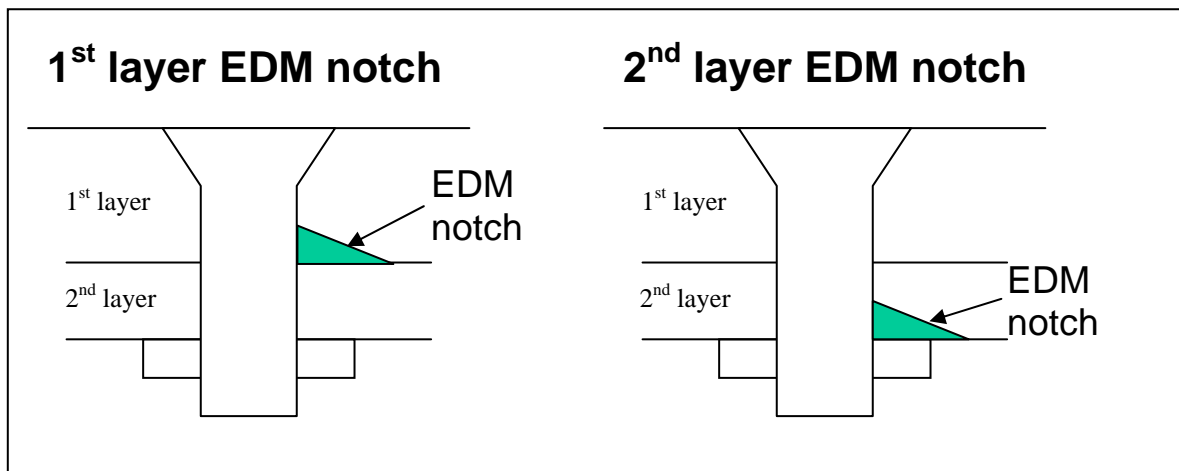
A schematic shows the cross section view of a fastener hole showing EDM notches in the 1st layer and 2nd layer, respectively. The ferromagnetic fasteners are countersunk and flush with the top surface.
